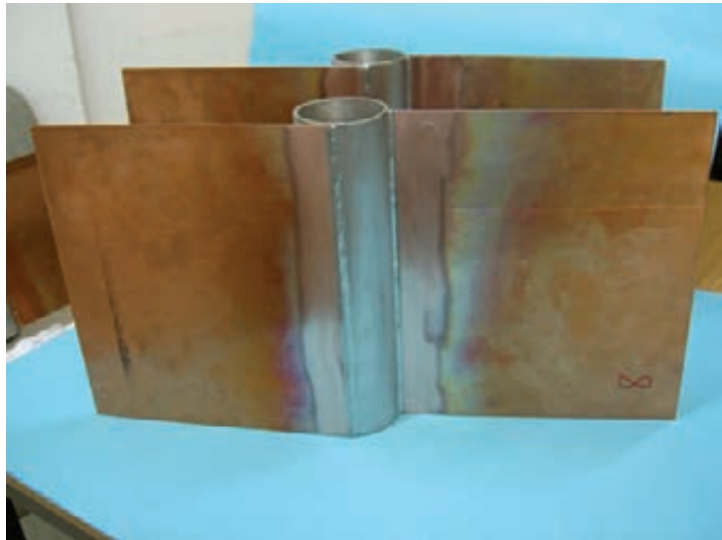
Prototypes of tested and optimized manifold shielding system. The shielding Cu plates are welded by hand to the SS supply pipes under the use of an interface material which was previously electron beam welded.
